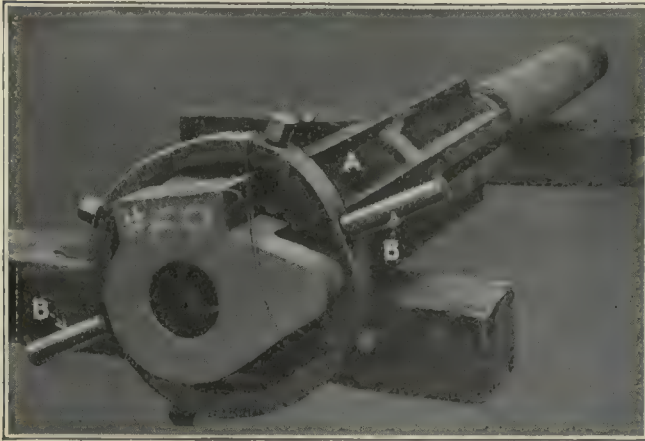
4.7-IN. TUBE WITH JACKET SHRUNK ON
